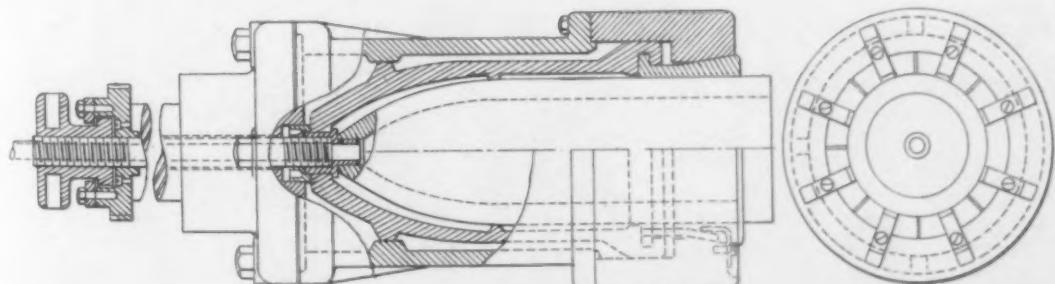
CROSS-SECTIONAL VIEW OF POT CHUCK IN WHICH THE SHELL IS PLACED FOR THE FINISHING OF THE INSIDE
